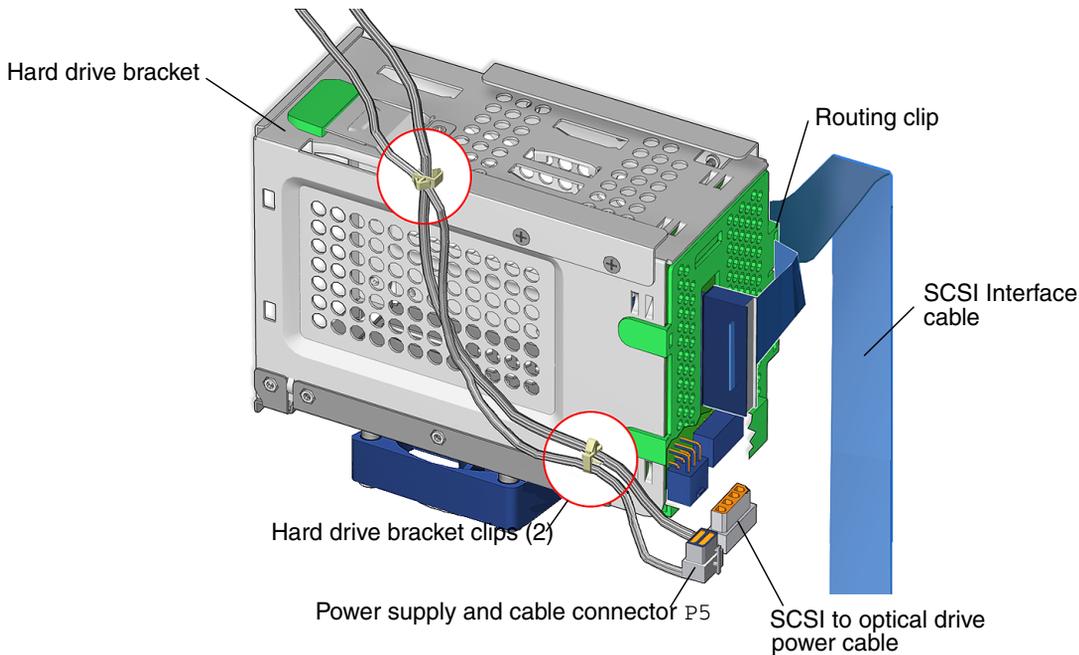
Disconnecting the Hard Drive Bracket Cables
